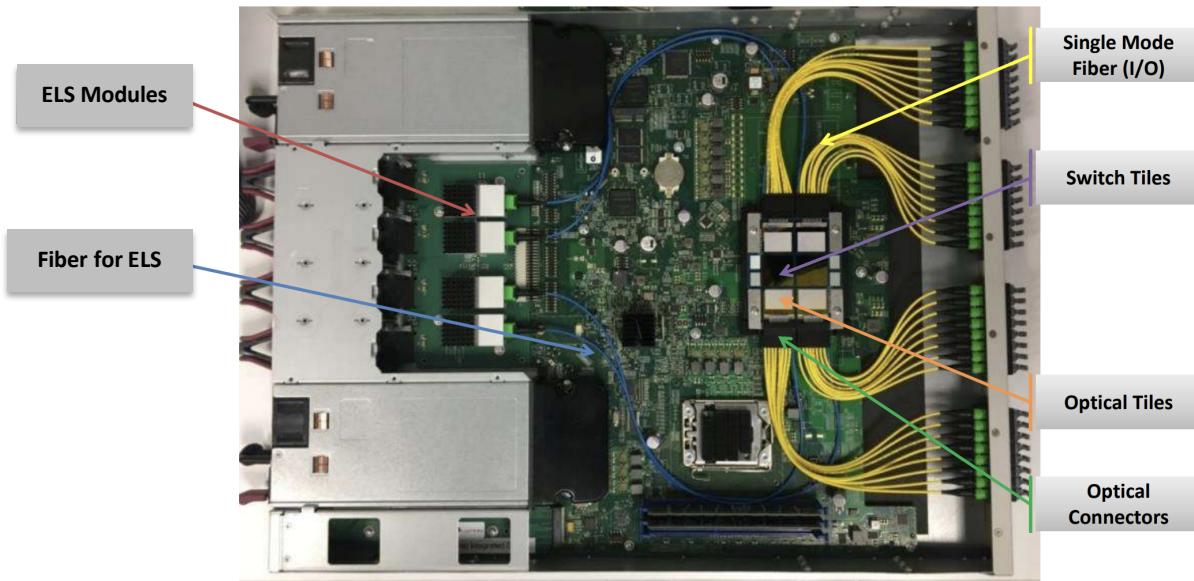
Example of CPO assembly with pluggable ELS module on the switch PCBA (courtesy of Cisco)
